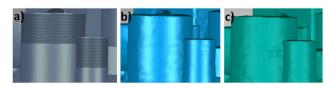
Comparison of threaded element defects, a) CAD, b) GA piece and c) MA piece.
